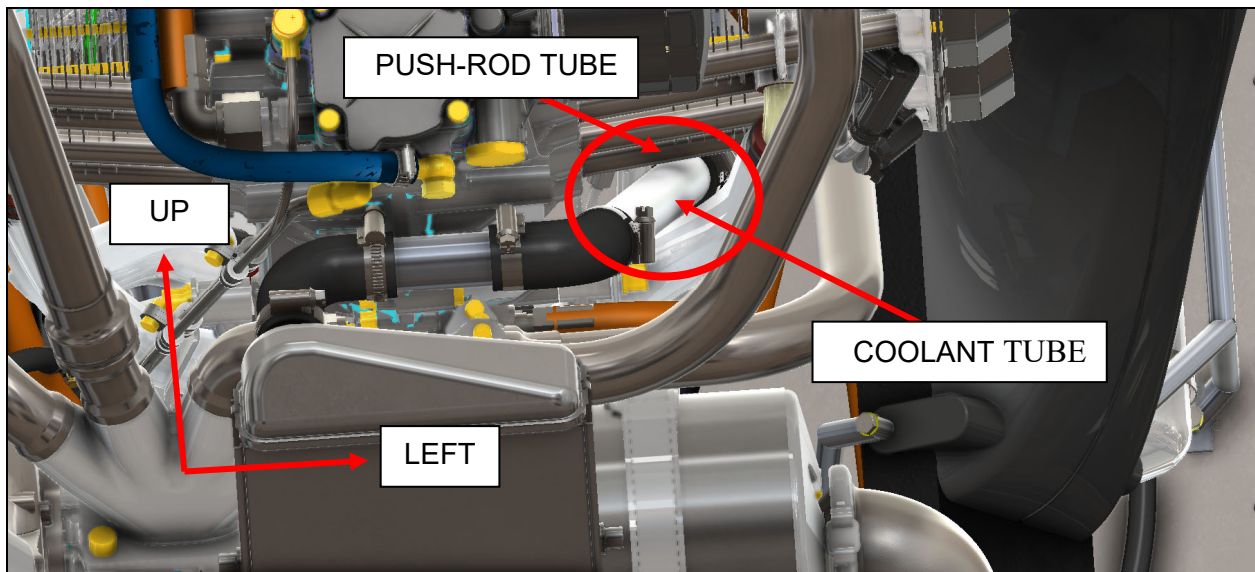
COOLANT TUBE VS PUSH-ROD TUBE
